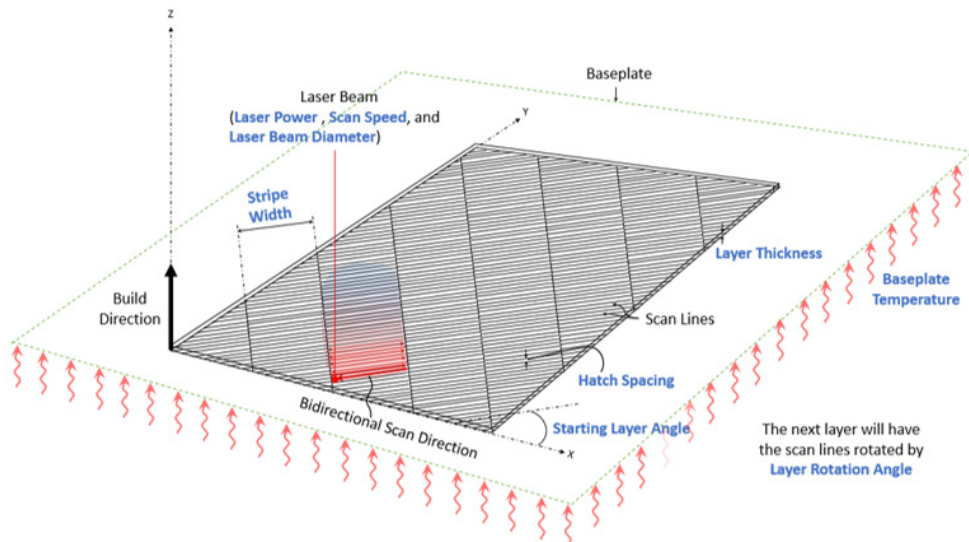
Machine parameters for a typical rotating stripe scan pattern.
